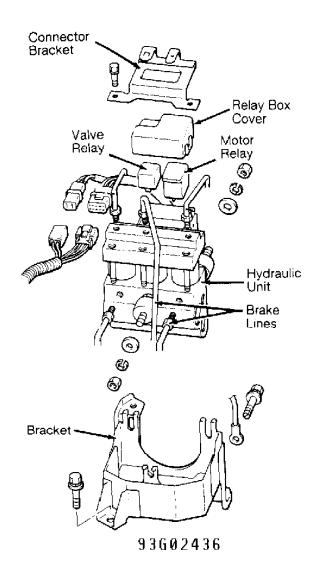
Exploded View Of Hydraulic Unit & Components Courtesy of Mitsubishi Motor Sales of America.
